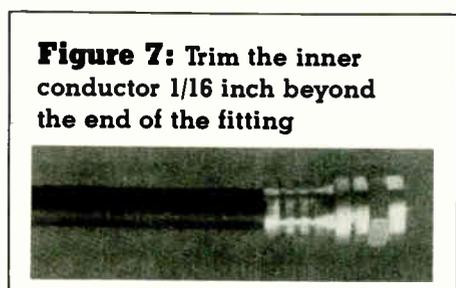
Trim the inner conductor 1/16 inch beyond the end of the fitting
